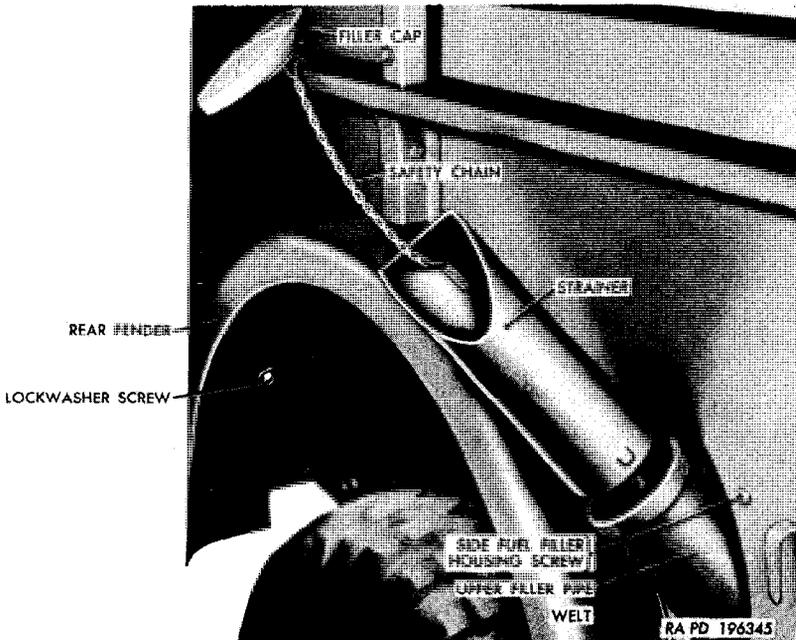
Fuel filler cap, strainer, and upper filler pipe.
